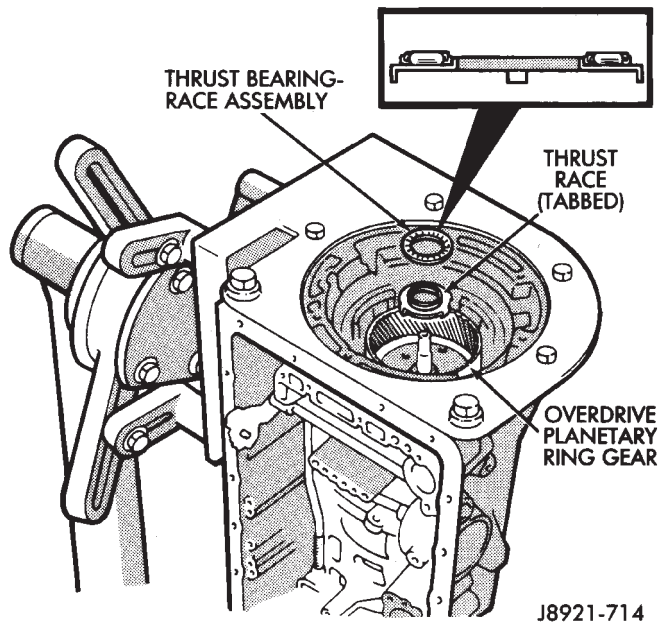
Installing Ring Gear Thrust Bearing And Race
